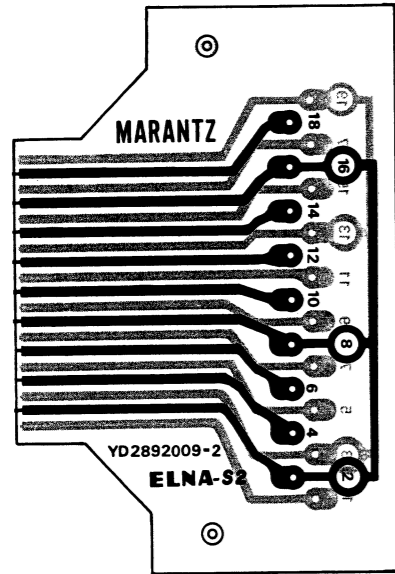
Dolby Terminal Assembly PV01 Component Locations
